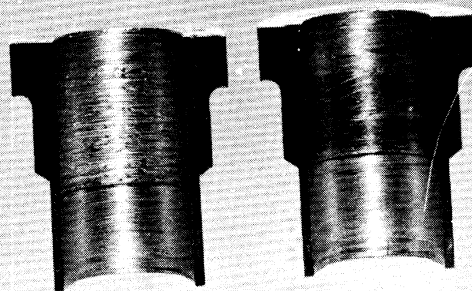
Material 111. View of drilled surface produced on piece No. 3 (left) and piece No. 2450 (right) at end of run.
